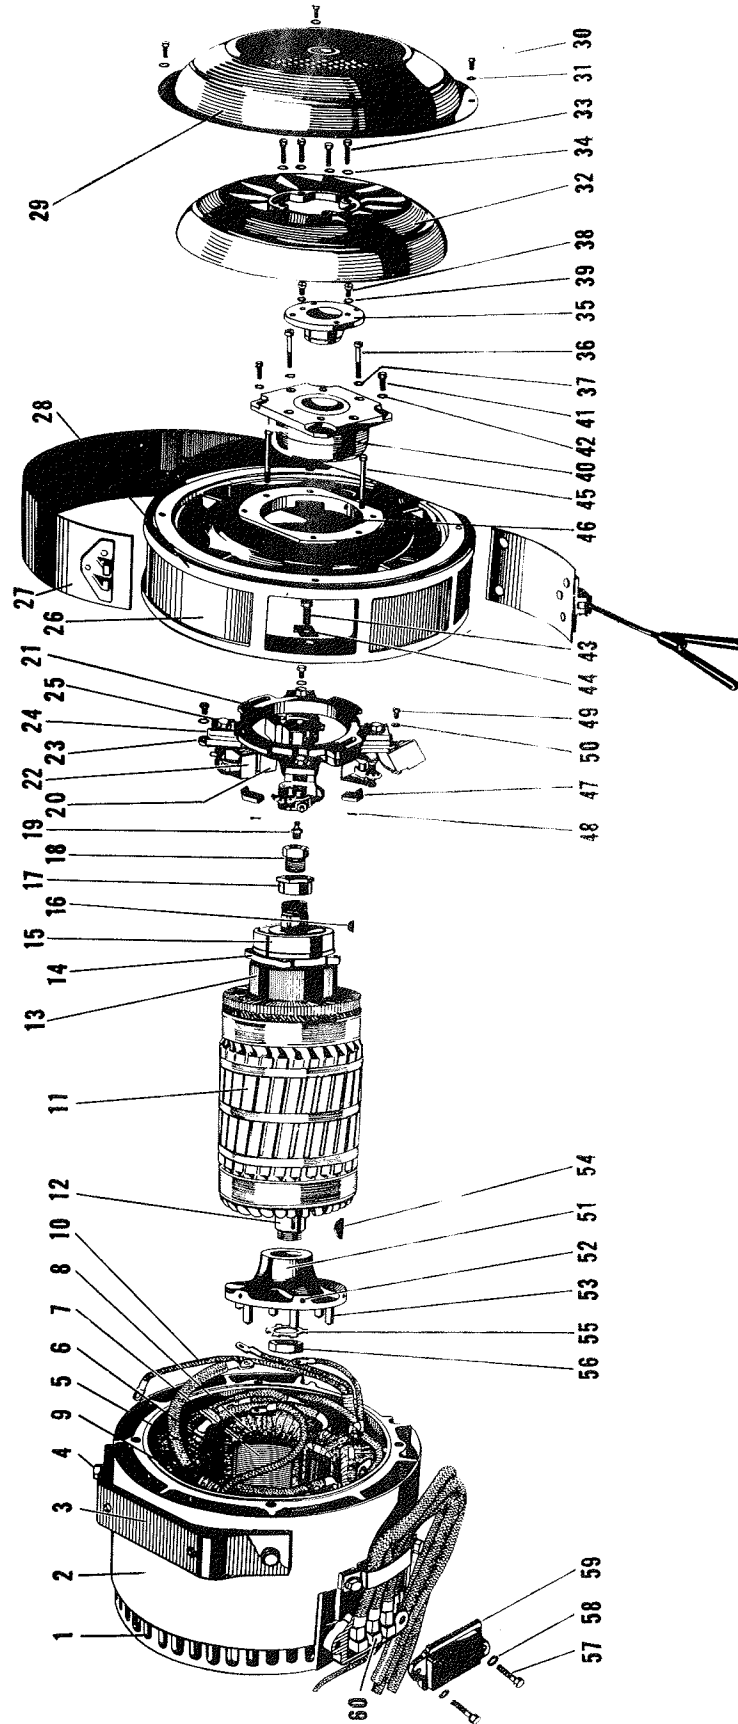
EXPLODED VIEW — GENERATOR TYPE K3W
